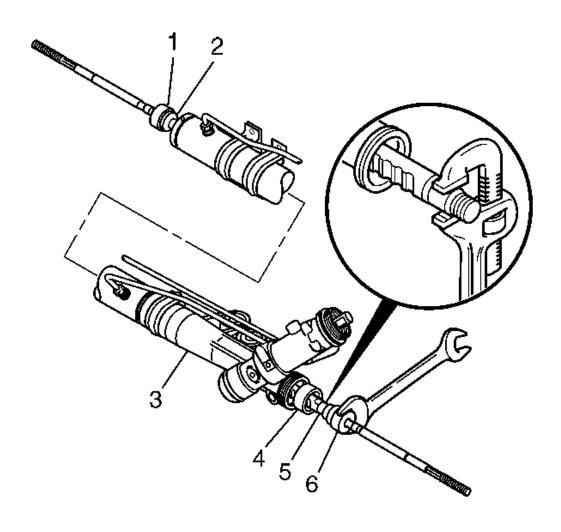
Identifying Inner Tie Rod Components Courtesy of GENERAL MOTORS CORP.
